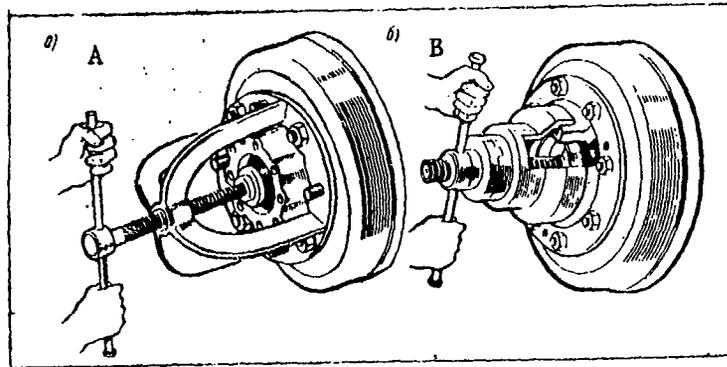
Removal of the hub (A) and pressing out (B) the external bearing ring
